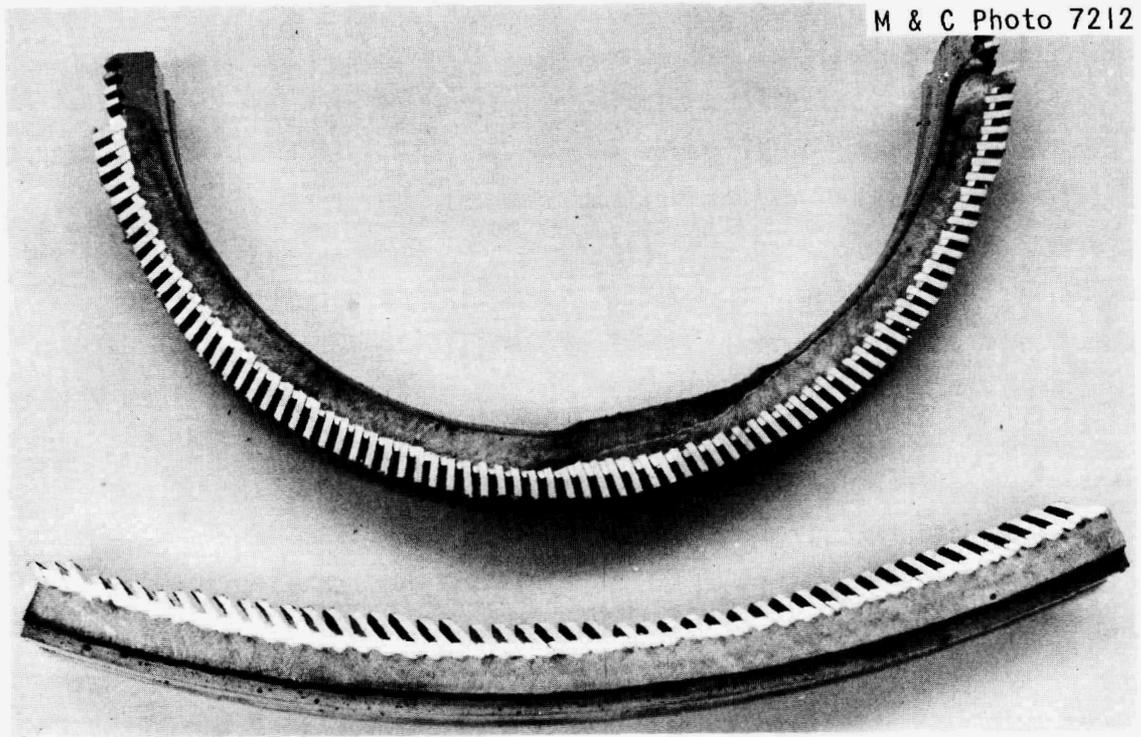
Cross Sections of Circular Weld-Test Segments.
